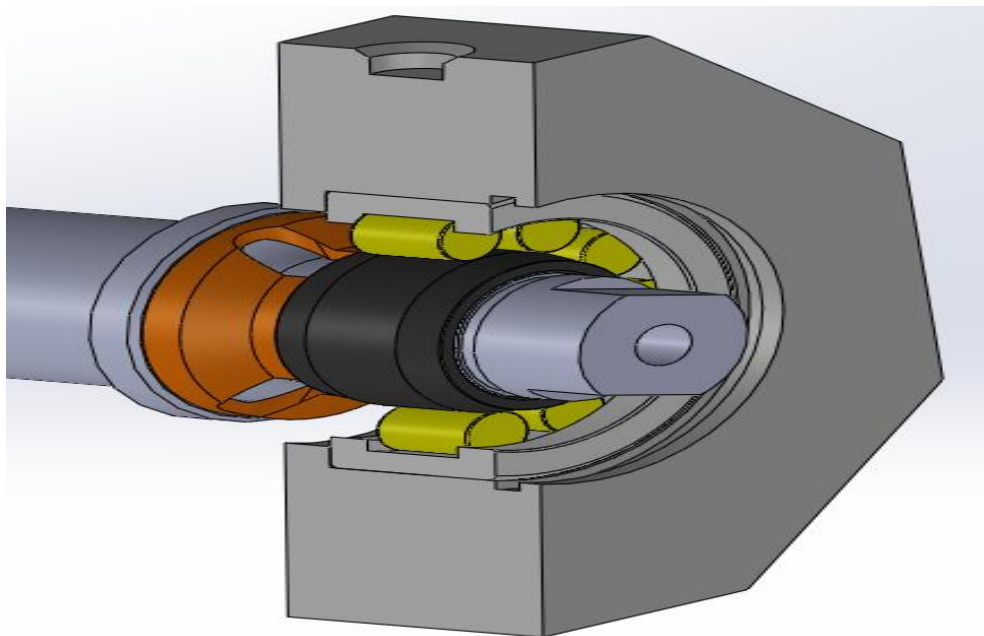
Cross section schematics of the 20mm ball position and two of the three inlets for the bearing puller.
